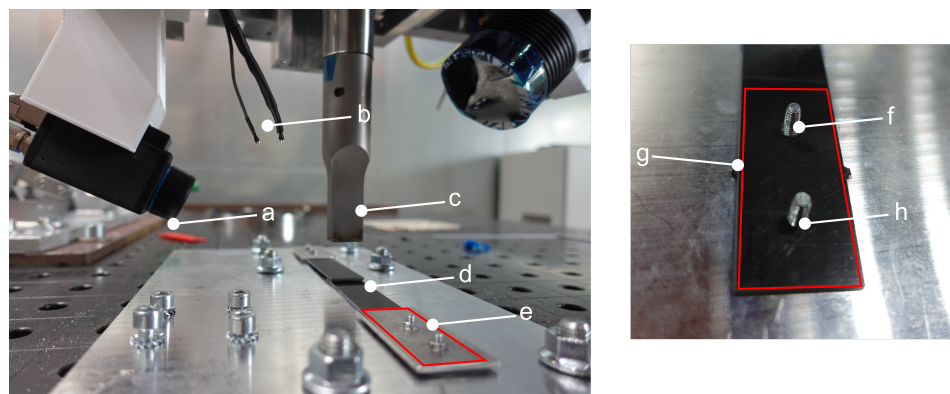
Welding setup. a: Thermography camera, b: Microphones, c: Horn, d: Welding samples, e: Plate to fix samples on the anvil, f: Long hole with screw, g: Extension of the sample, h: Hole with screw.
